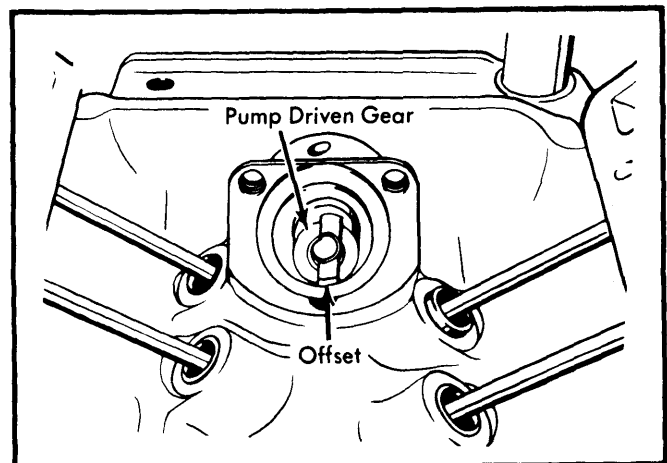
View of Offset on Pump Driven Gear (Shown With Intake Manifold Removed)
